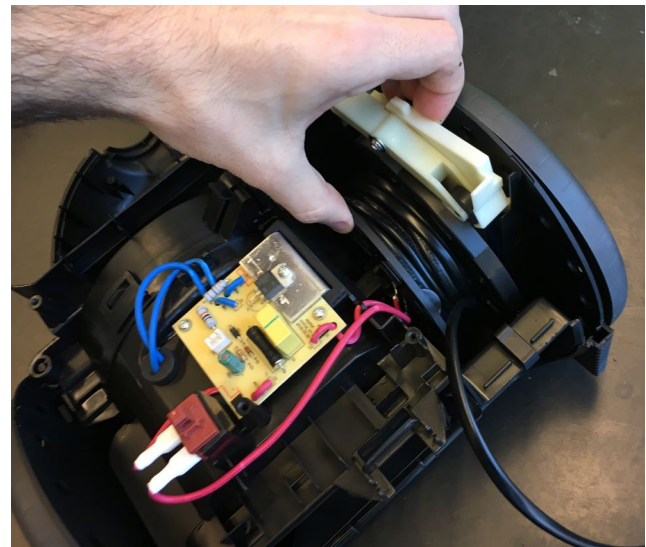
Dependent disassembly of motor and cord-winder in Philips Power Pro Active
